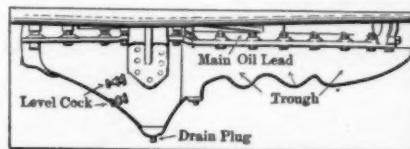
View of the lower part of the Ford crankcase casting, showing the exterior of the splash troughs and the flywheel casing
